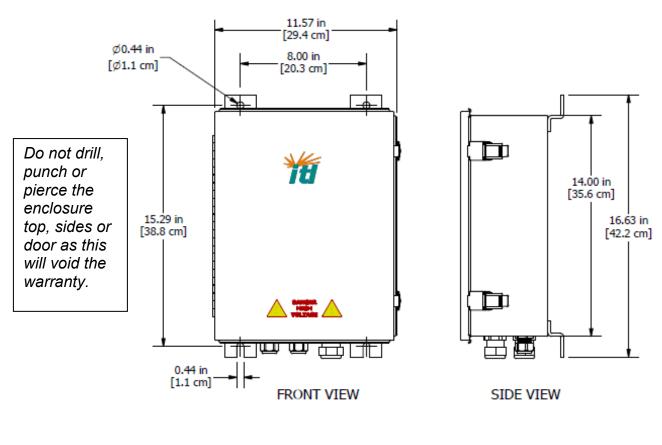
IFH-1900-0IR Flash Head Dimensions and Mounting Detail
